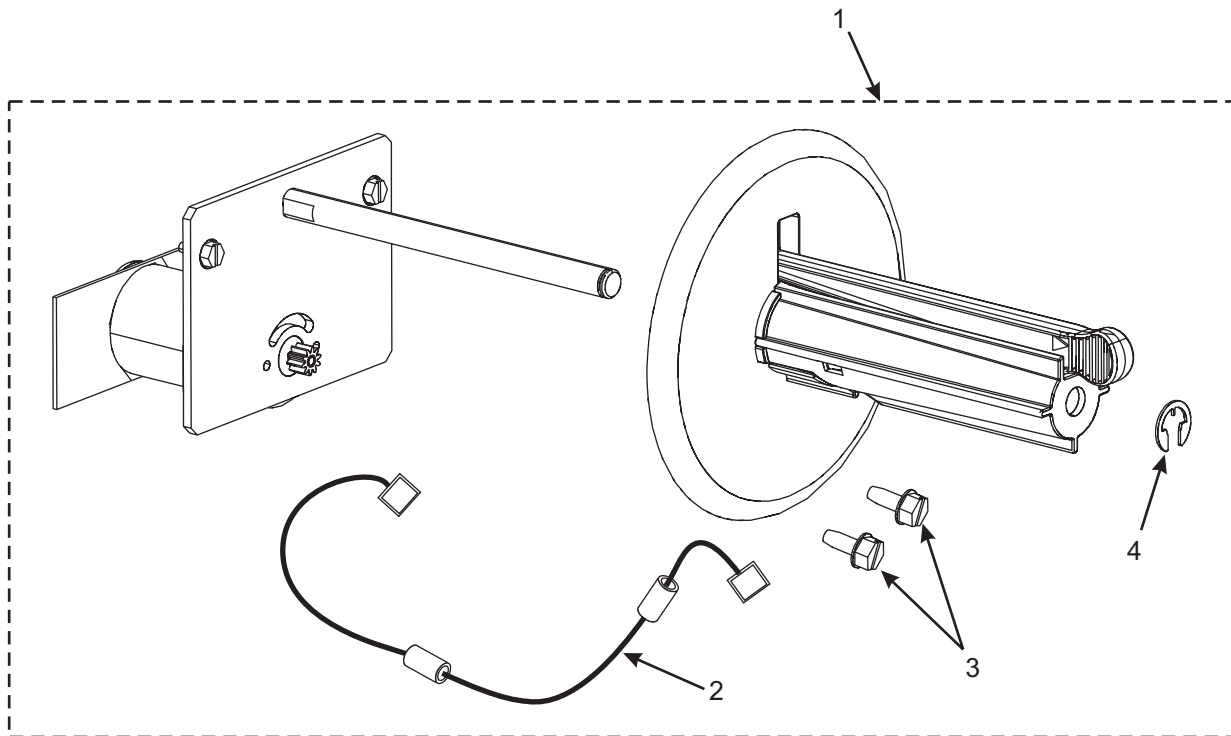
Liner Take-up Assembly (Z4M Only)
